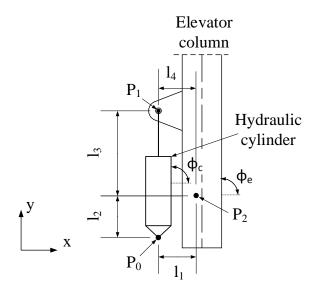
Sketch of elevator column and hydraulic cylinder
